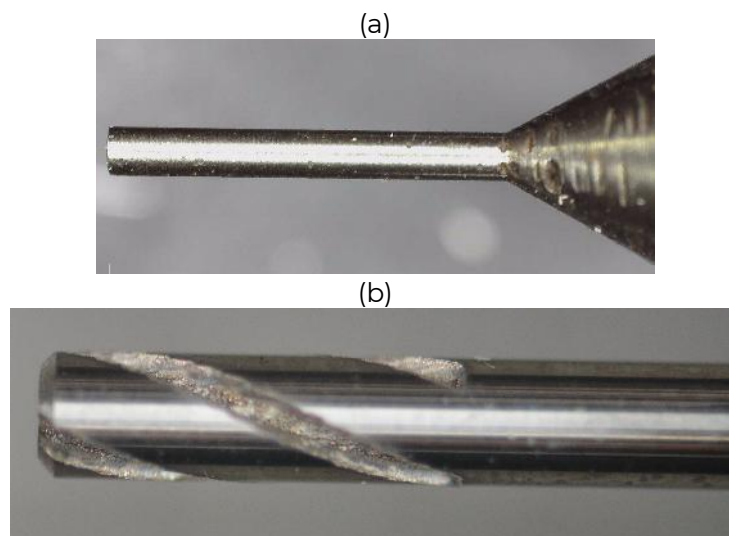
Outputs of (a) water jet guided laser turning of drill shanks and (b) short-pulsed laser machining of flute geometries on drill shanks
